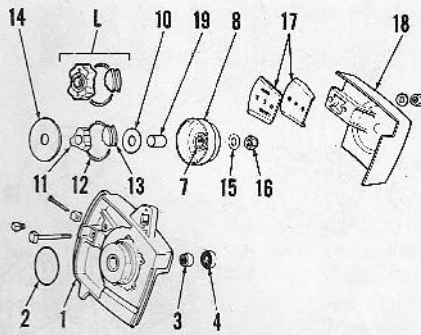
Exploded view of main bearing housing and clutch typical of type used on models with manual chain oiler. Metal side of seal (4) should be toward outside with lip in toward main bearing (3). Clutch shoes, driver and spring shown at (L) is used on 1200 models.
